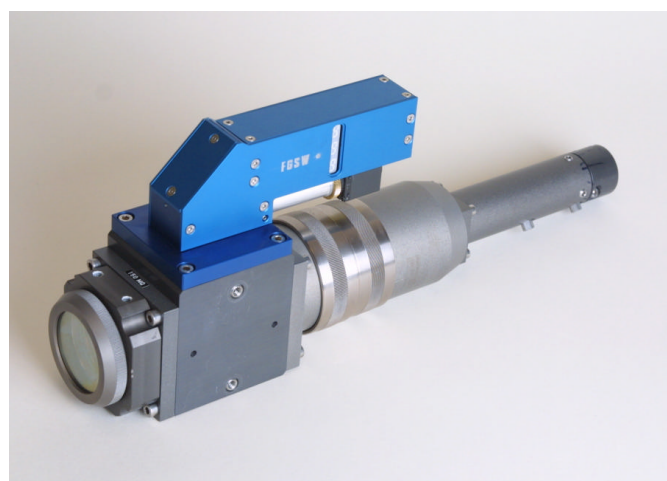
Detector head for process monitoring of laser beam welding.
